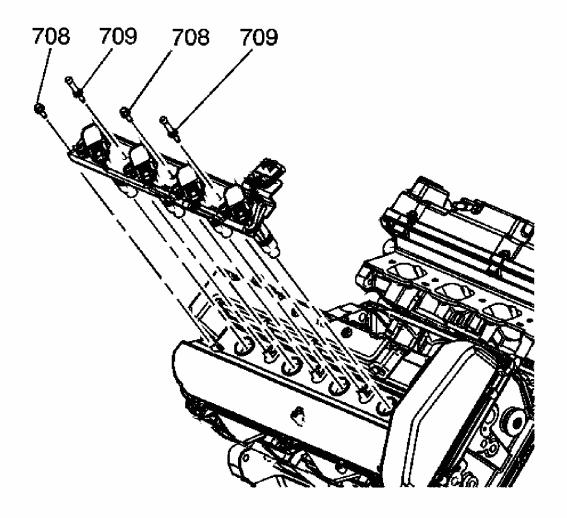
Identifying Ignition Coil Assembly Bolts & Ball Studs Courtesy of GENERAL MOTORS CORP.
